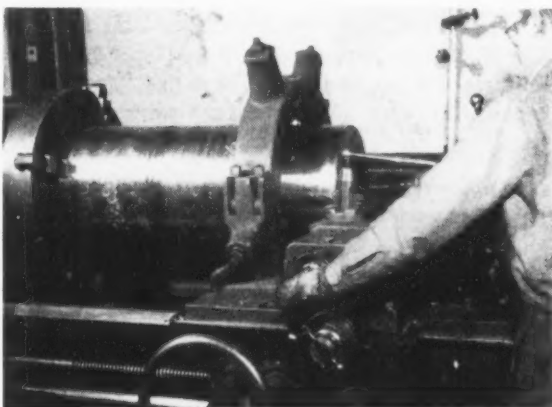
This ingot being conditioned at Rem Cru for roll cogging or forging weighs about 1000 pounds, which is the average ingot weight being produced at the moment.
